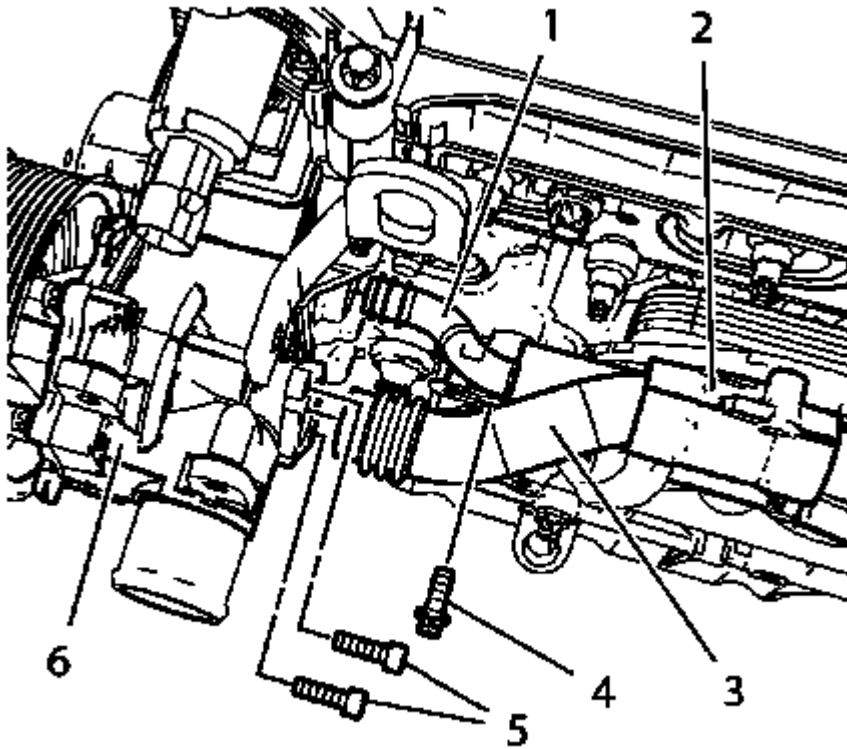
Engine Oil Cooler Housing, Engine Oil Cooler Inlet Pipe And Engine Oil Cooler Outlet Pipe
